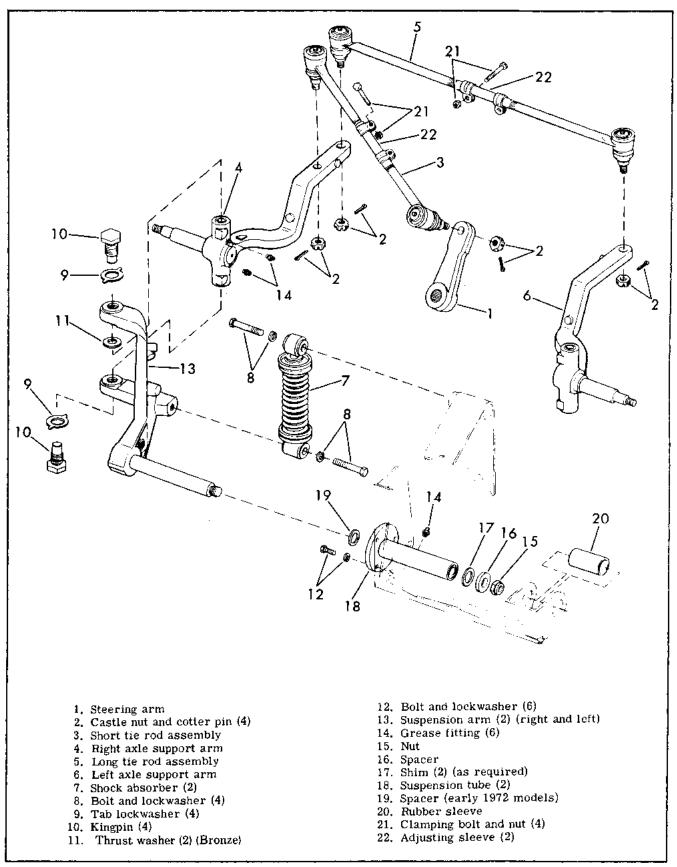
F-78B. Front Suspension, 4 Wheel Car - Exploded View
